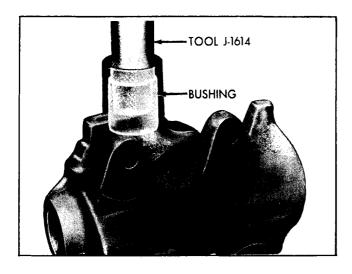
Removing Pitman Shaft Bushing Using Tool J
